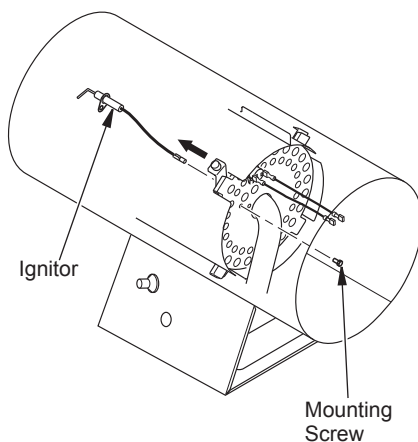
Removing Ignitor Mounting Screw and Ignitor
